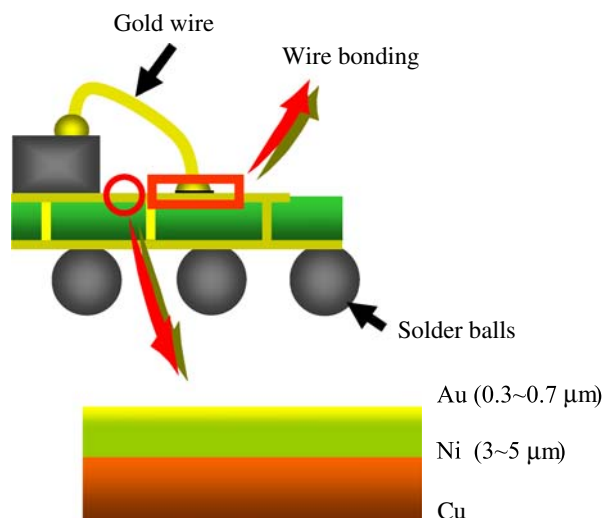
Schematic PCB assembly structure showing final finishes (Au/Ni layers).
